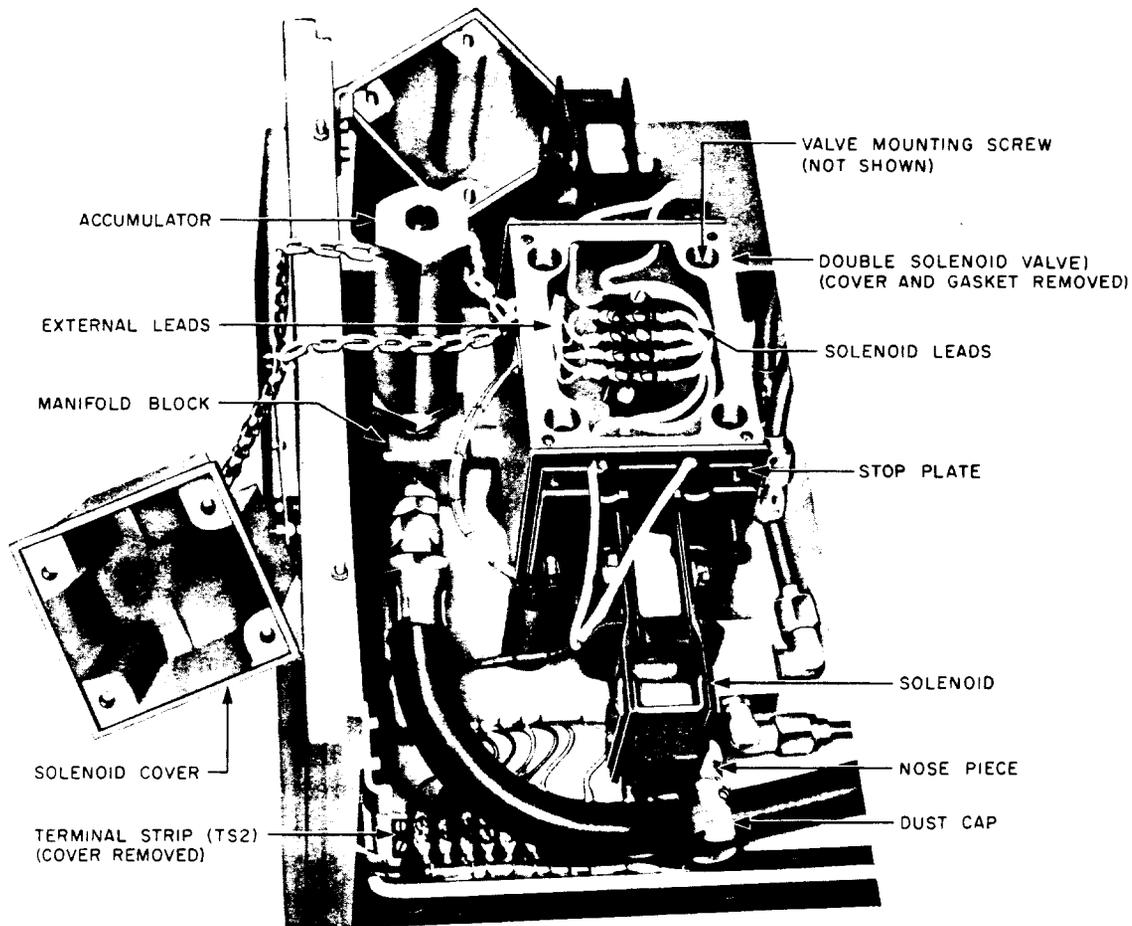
Hydraulic Shelf Assembly (partial view with double-solenoid valve cover and gasket removed)
